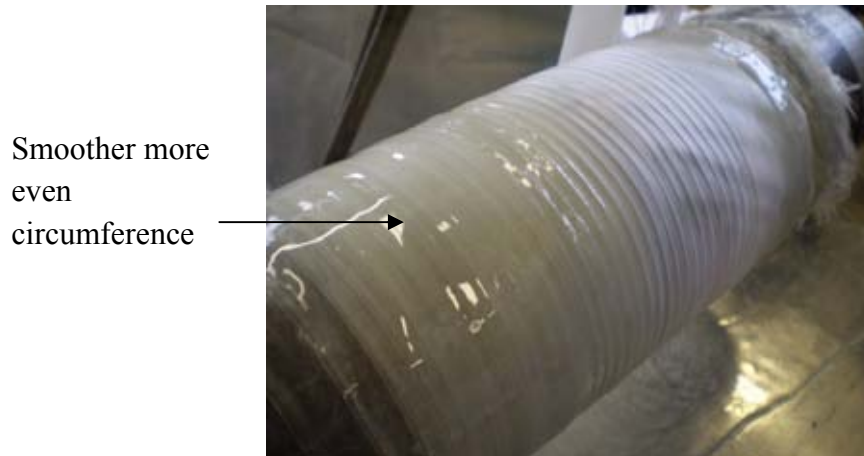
Photograph showing a tube produced from two layers of DLW and a final layer of peel-ply being applied under tension. The image shows an increase in the surface quality due to the peel-ply layer and tension.
